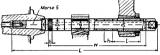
MILLING ARBOR WITH DISTANCE RINGS
